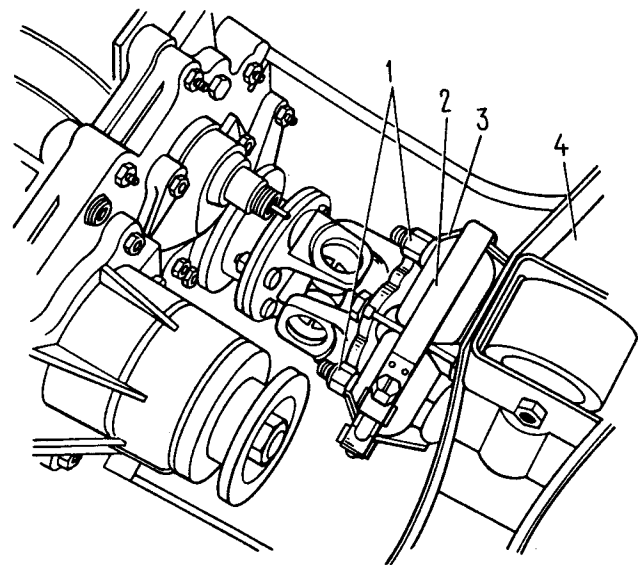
Propeller Shaft-to-Gearbox Flexible Coupling:
